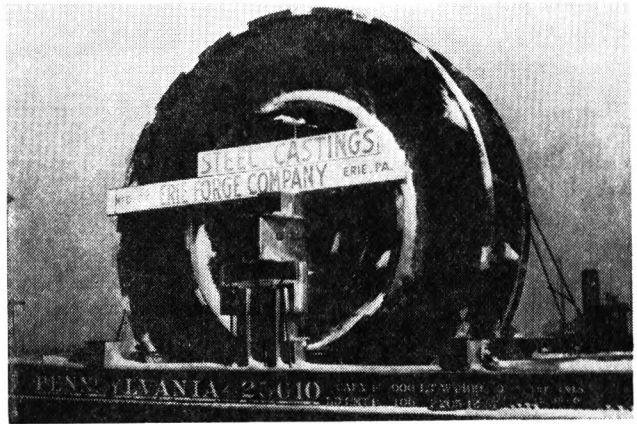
RUNNER CASTING FOR 150,000-Hp TURBINE
